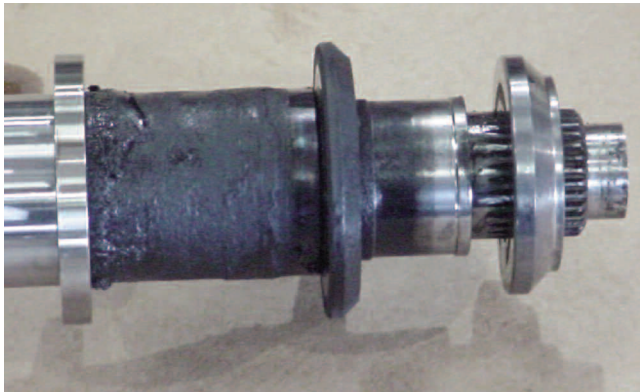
Closeup of Output Shaft Showing Burned Oil Around Secondary Seal.
